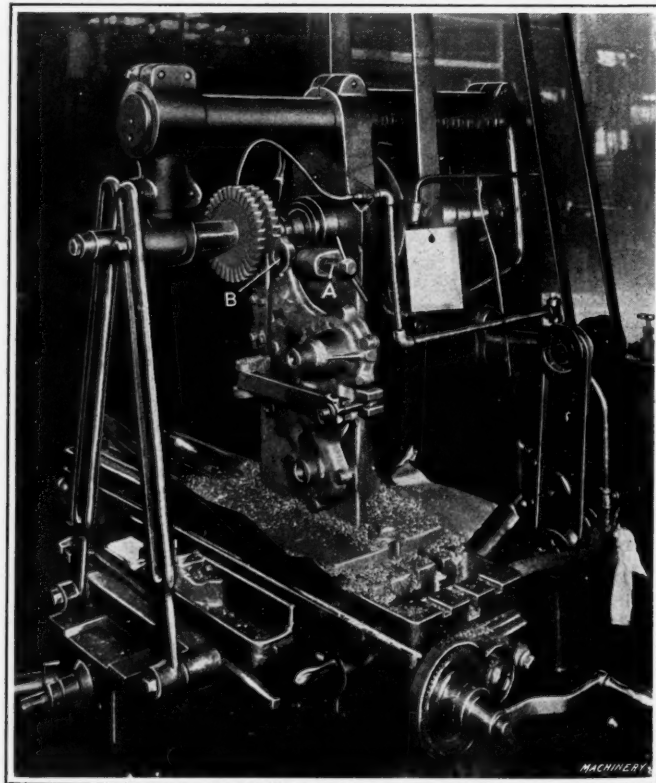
No. 1 1/2 Cincinnati Milling Machine with Fixture for straddle-milling Starter-shaft Bearing Boss on Timing Gear-case Covers
